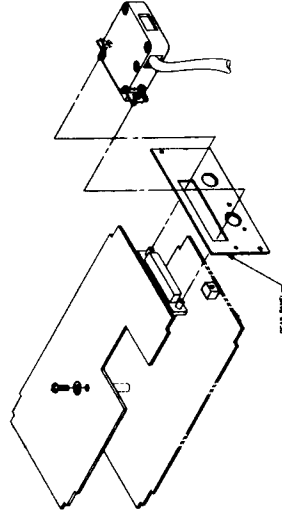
ATTACHING BCD MATING CONNECTOR
